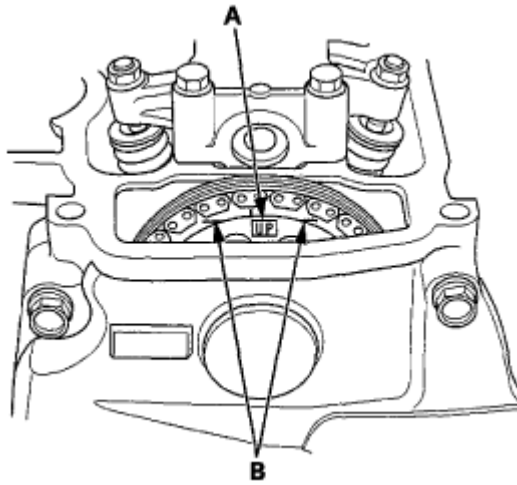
Locating UP Mark On Camshaft Sprocket And TDC Grooves On Camshaft Sprocket
